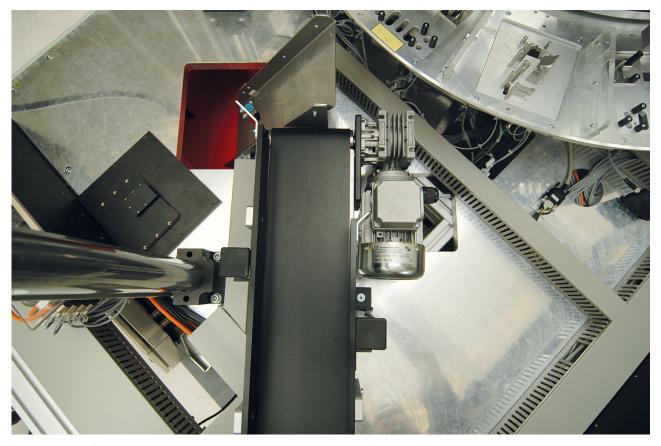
Example of a haptic check of automotive switches with a 3D-printed fixture.
